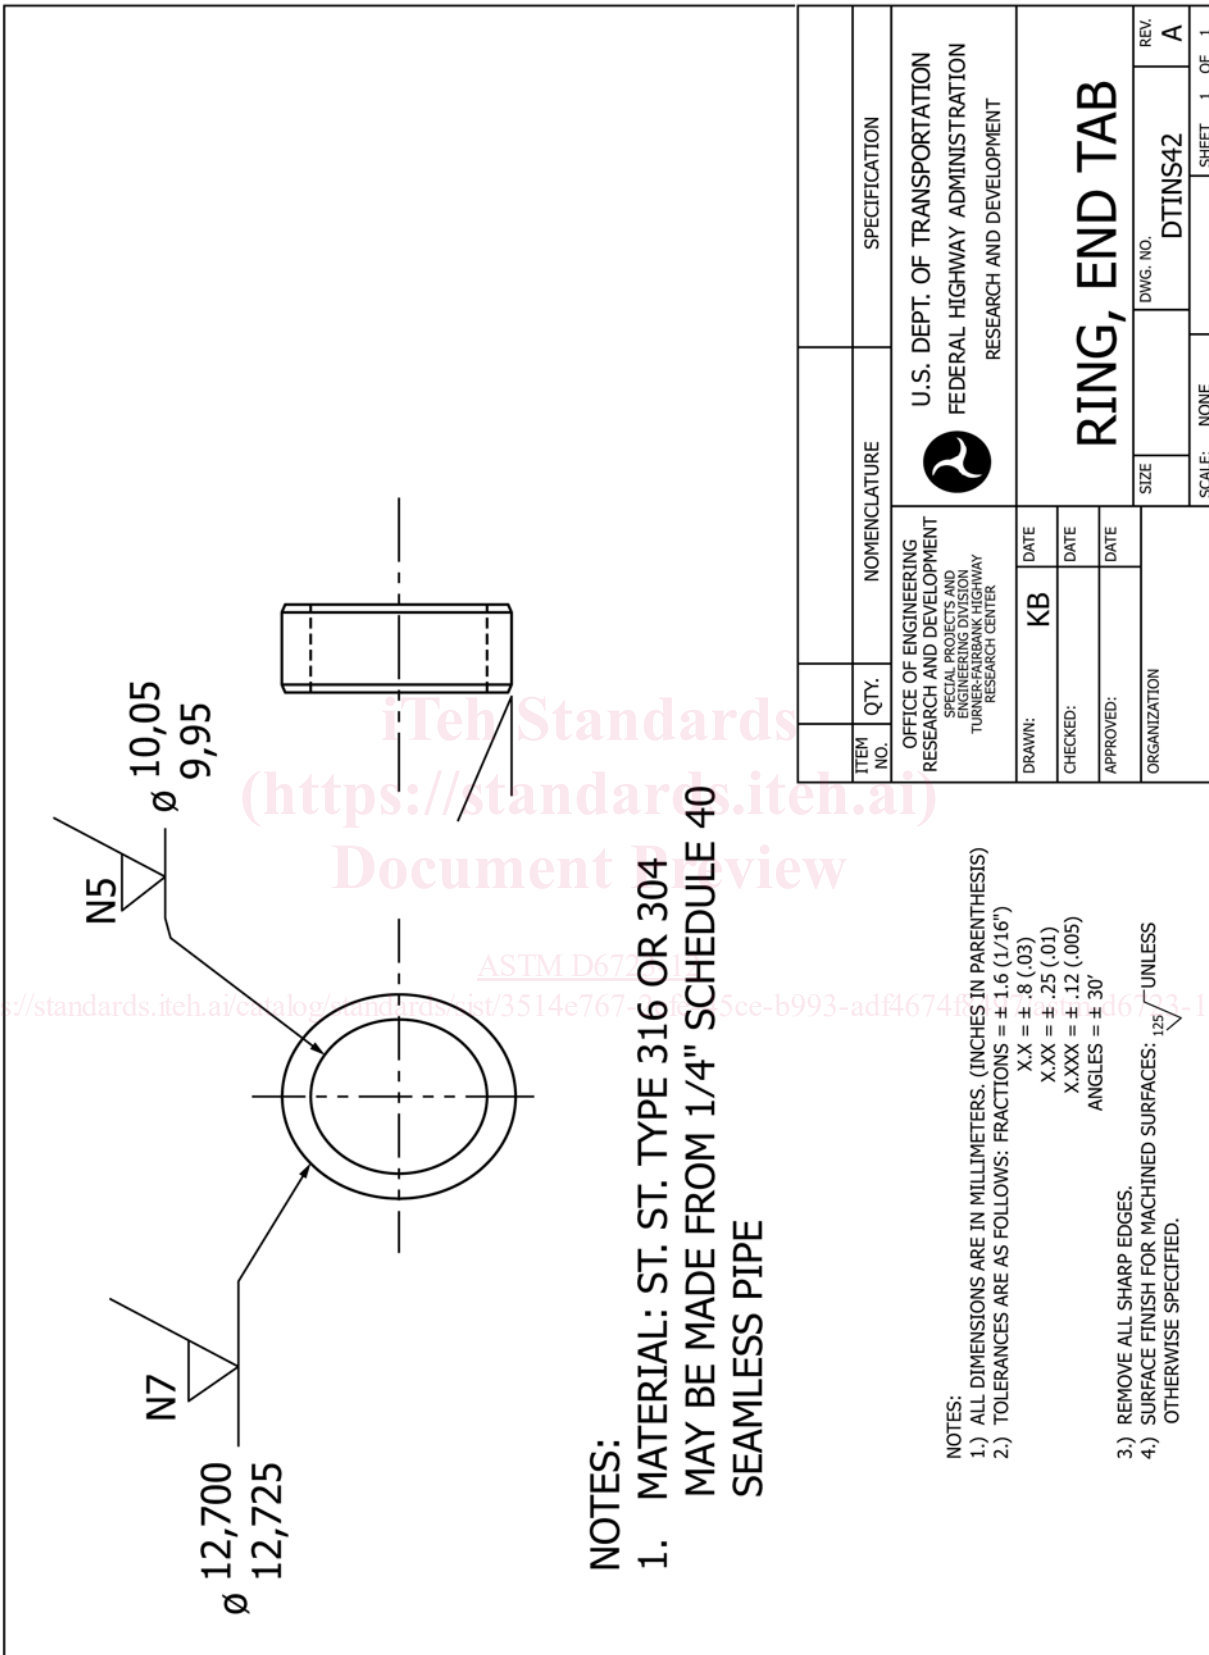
Superpave End Insert Metal Ring for Direct Tension Test
